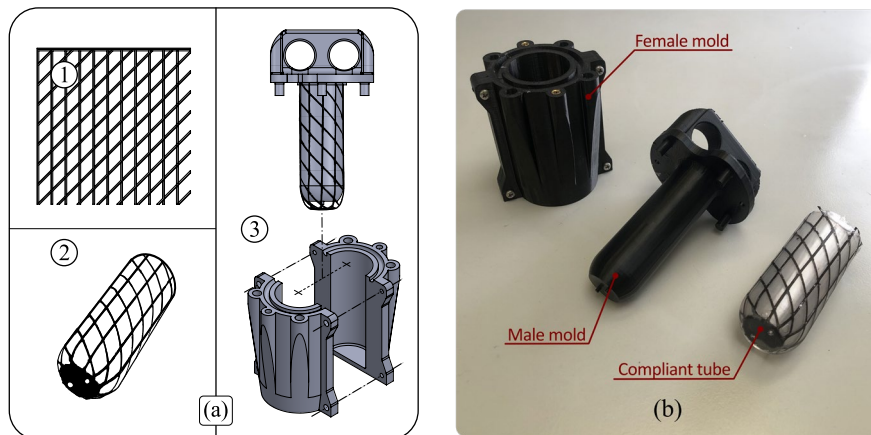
The compliant tube fabrication process: (a) the different fabrication phases and (b) the PLA 3D printed molds and the produced compliant tube
